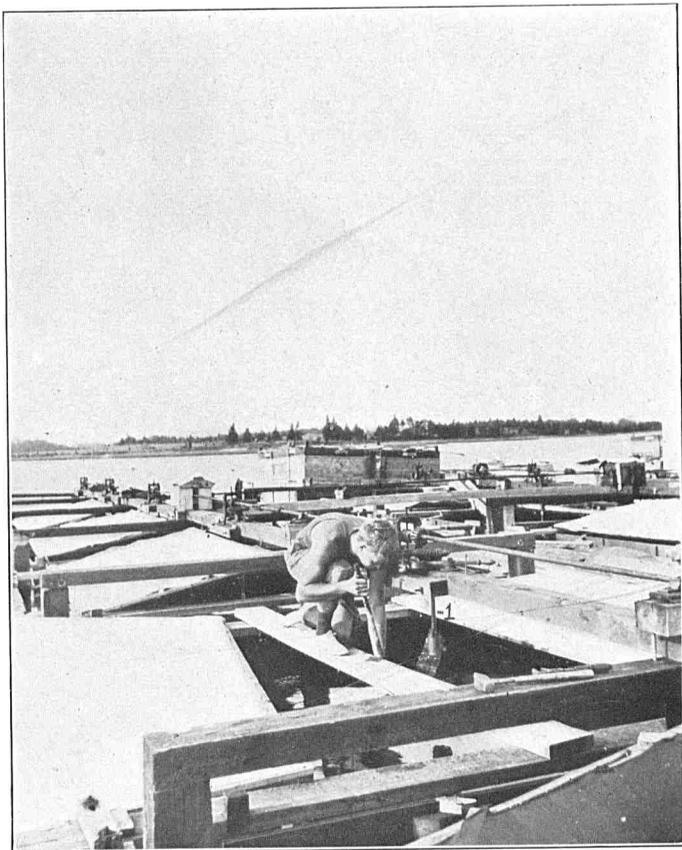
Lifting the disconnected propeller out of the water. The upper portion of the shaft with the sleeve coupling is seen at 1.
